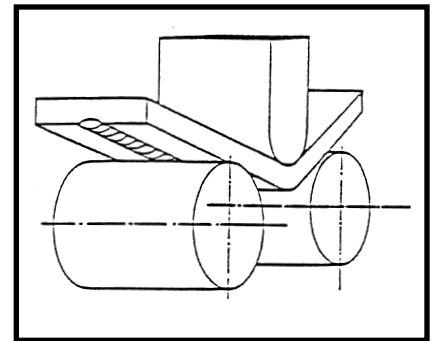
Schematic bend test setup with position former, support and weld bead.
